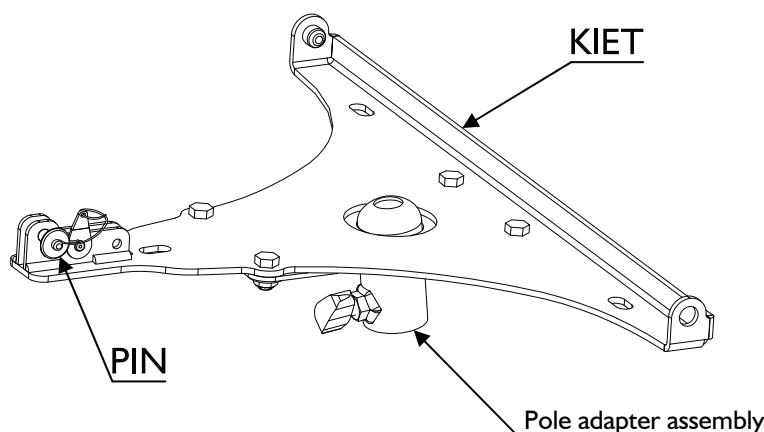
KIET with pole adapter assembly (use for pole mounting applications)
